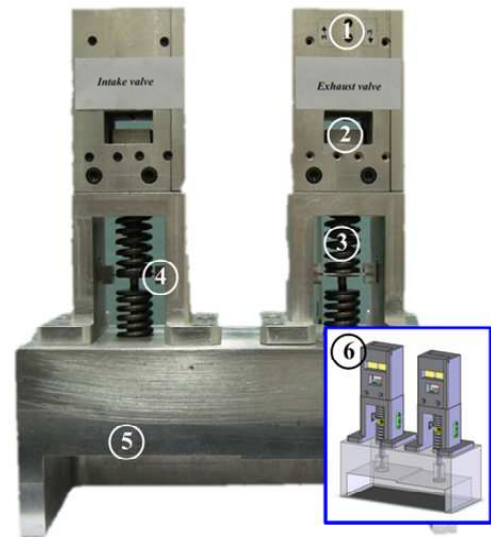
The proposed prototype: (1) electromechanical device; (2) armature; (3) valve springs; (4) position sensor; (5) intake and exhaust valves; (6) CAD diagram.
